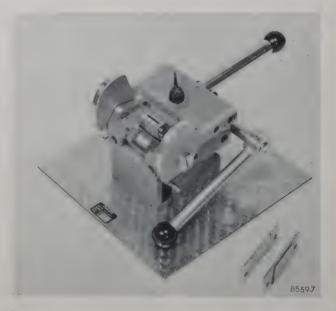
The newly developed machine for testing sheet or strip metal for its bending properties. The test specimen is inserted between rollers and a radius plate. At the right can be seen two of the interchangable radius plates over which the specimen is bent.
